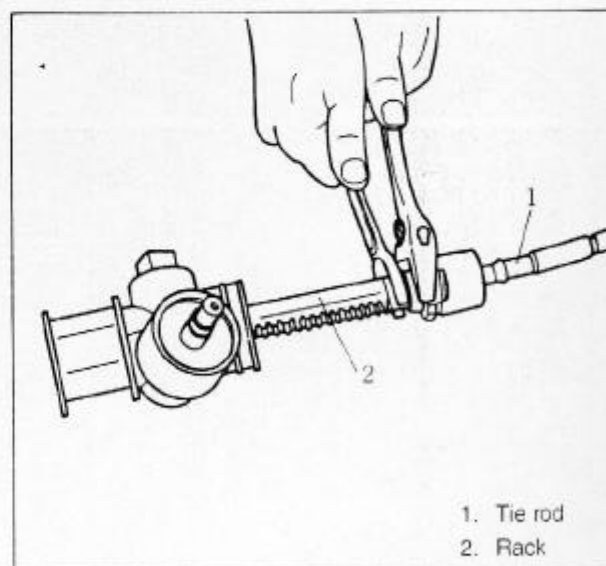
B — 6 DISASSEMBLING STEERING TIE ROD
